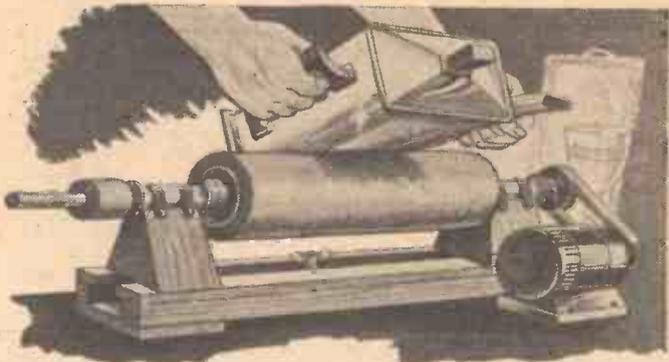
The buffing machine set up for polishing household cutlery, etc.
